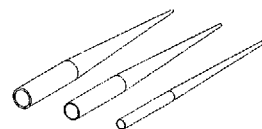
O-ring Tools (A-dec Part No. 009.013.00)
